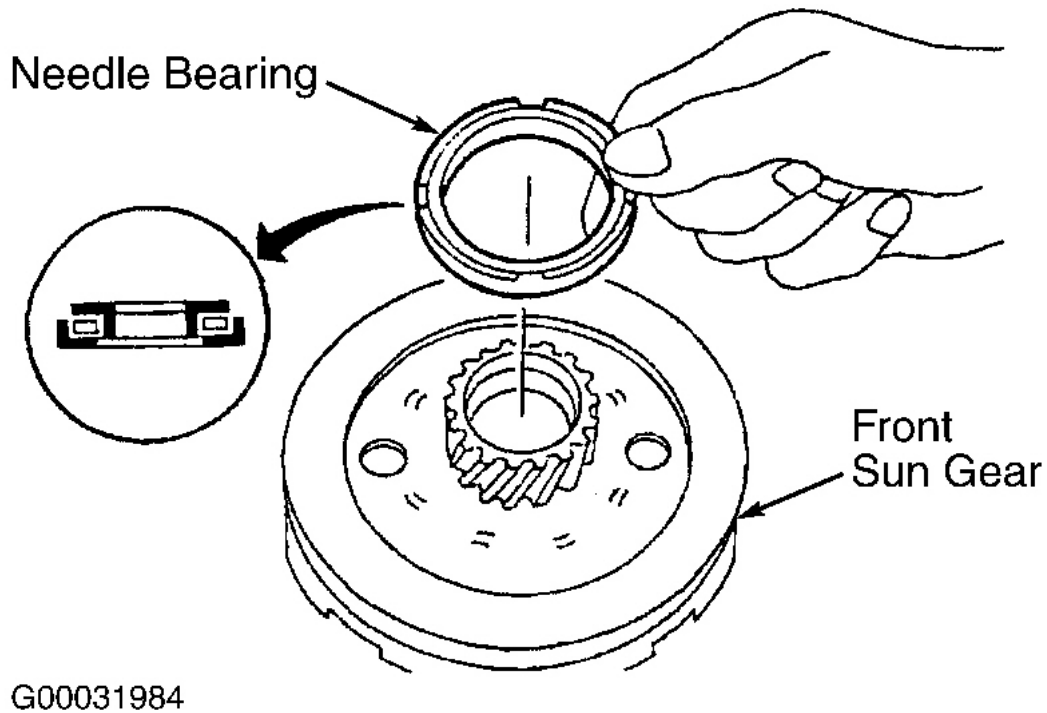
Identifying Front Sun Gear Thrust Needle Bearing Location
